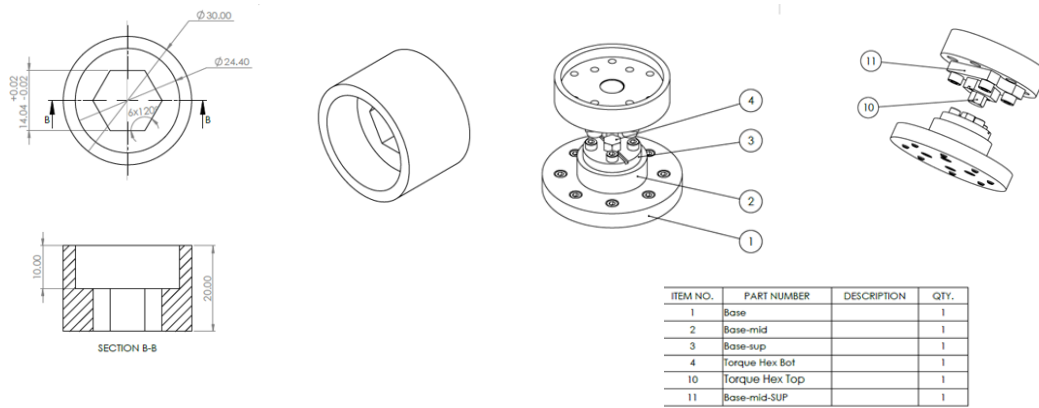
The drawings of endcaps (left) and test fixture (right) used in this work.
